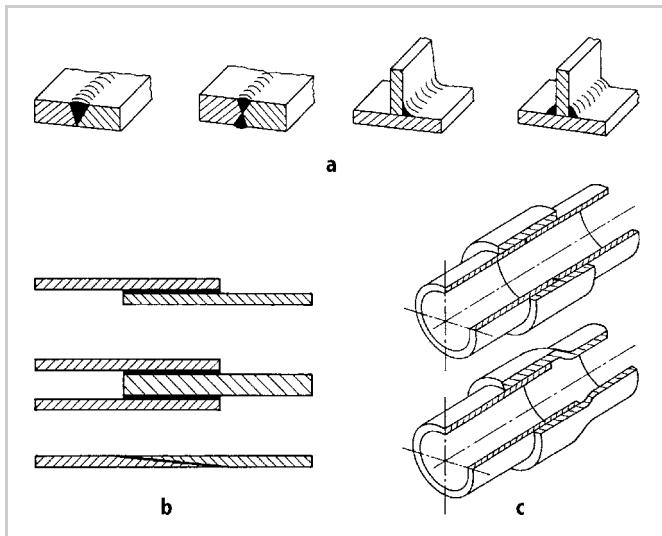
Types of material connection (selection). a welded connections, b adhesive connections, c soldered connections
